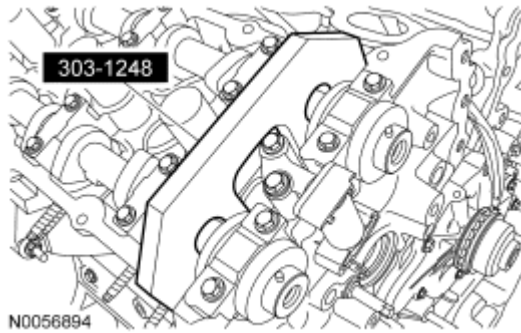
Removing Special Tool (303-1248) From RH Camshafts
